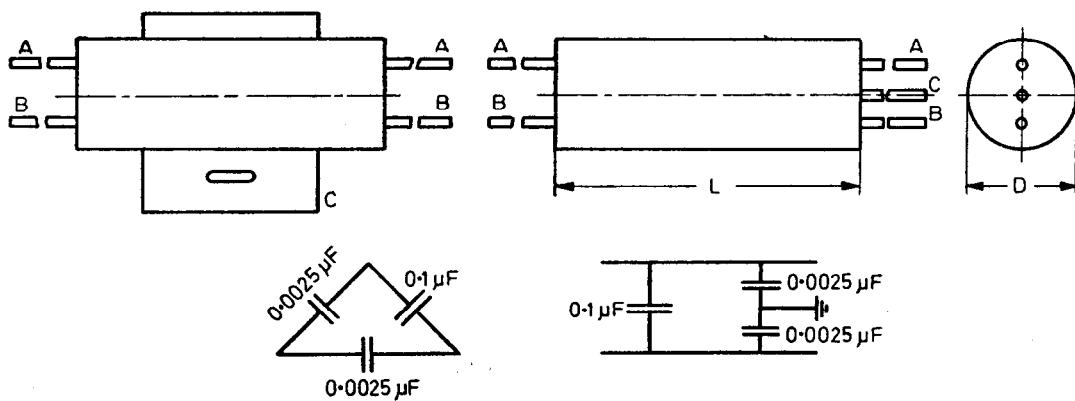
OUTLINE DRAWING AND DIMENSIONS
